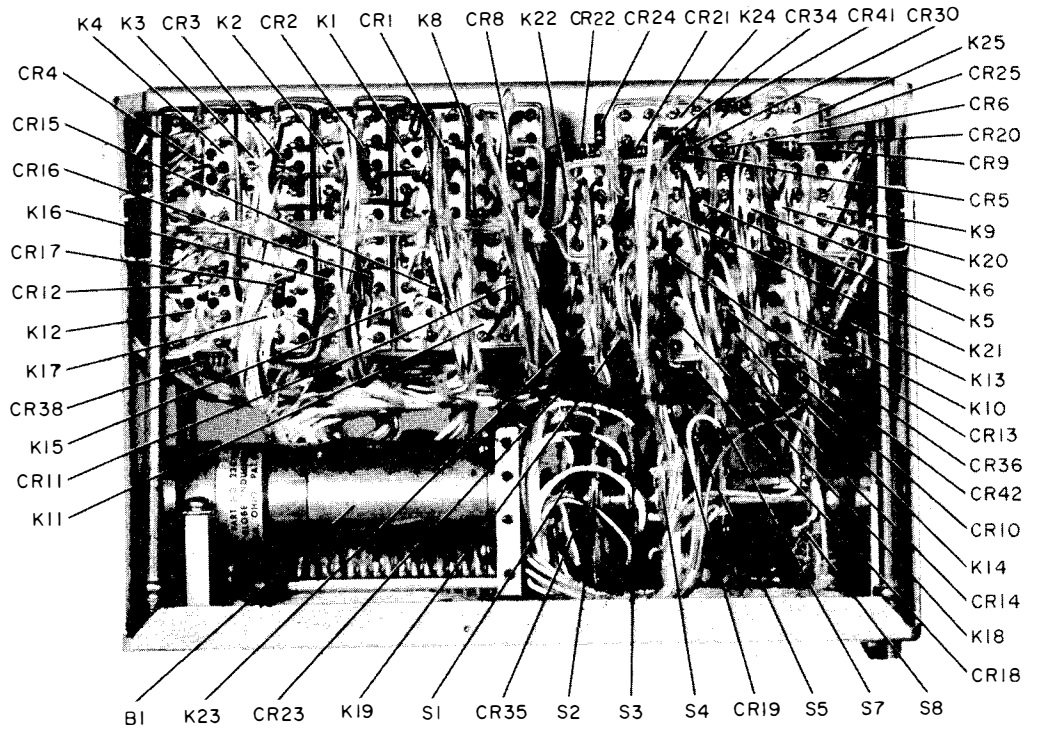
Antenna Coupler Servo-Control Assembly A7, Parts Location
